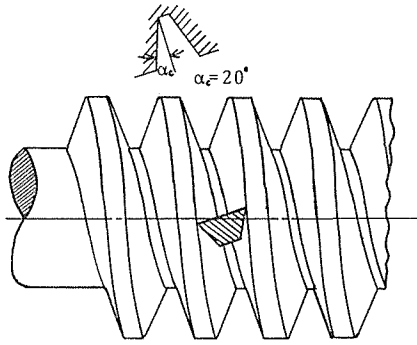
Thread cutting of the type-2 chased worm thread ($\alpha_c=20^\circ$)
